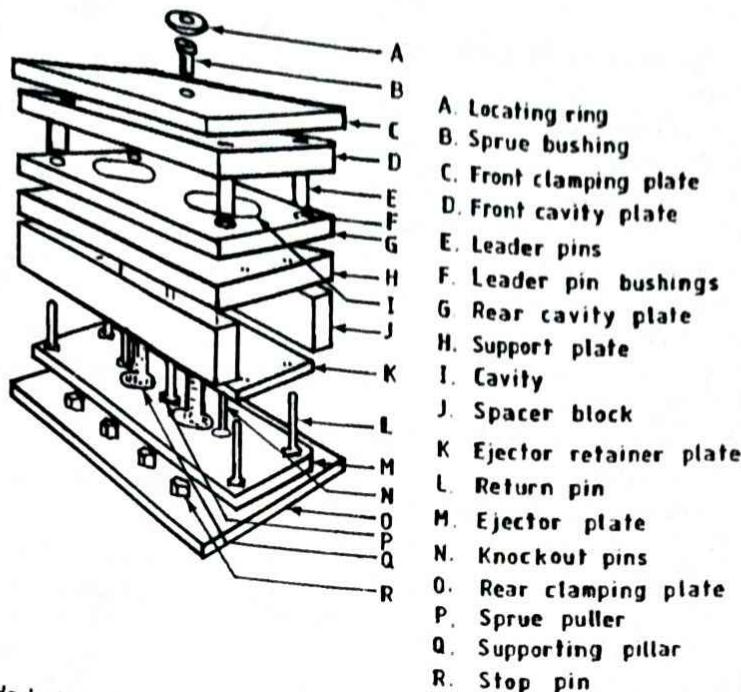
Exploded view of a six-plate mold base. (From Weir, C.L., *Introduction to Molding*, Society of Plastics Engineers, CT, 1975. With permission.)
